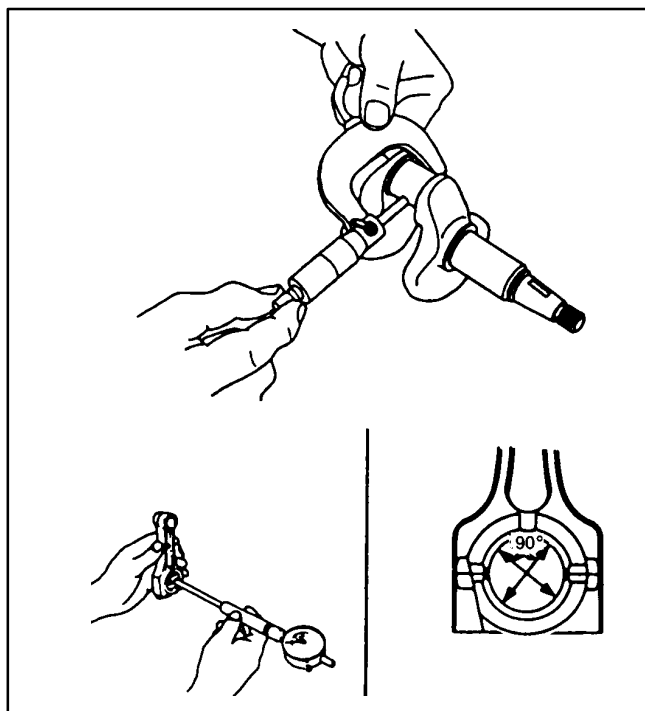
CRANK PIN AND CONNECTING ROD CLEARANCE
